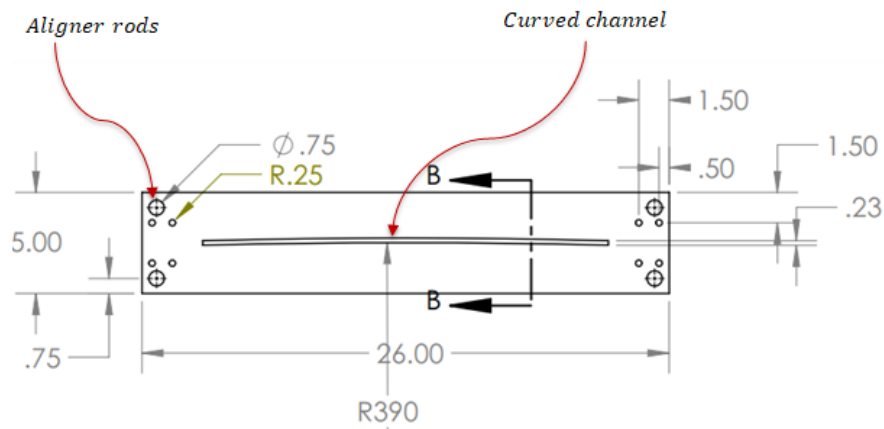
Details of the bottom fixture. Milled curved channel with $R= 390$ in for sliding in the test specimen. Tap drills for aligner rods to ensure vertical centering of the test specimen. Tap drills for attaching L- clamps for side fixtures
